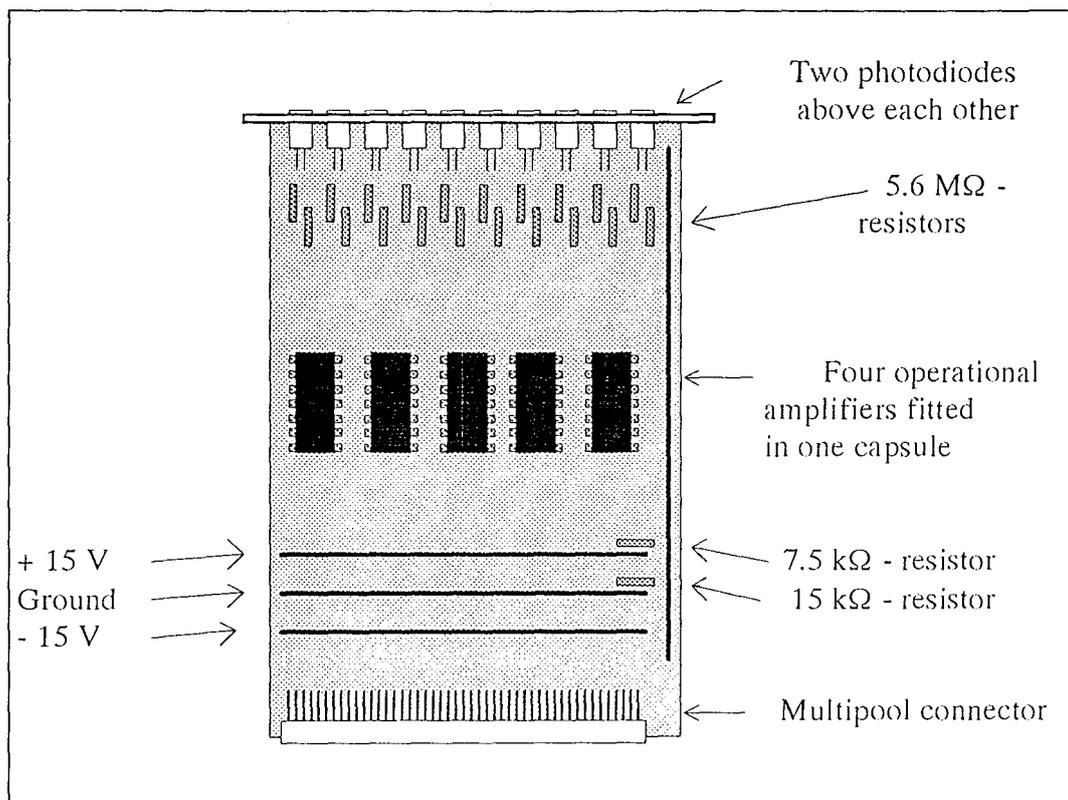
A permanent printed circuit card has been produced by soldering. This should be placed in a rack.
